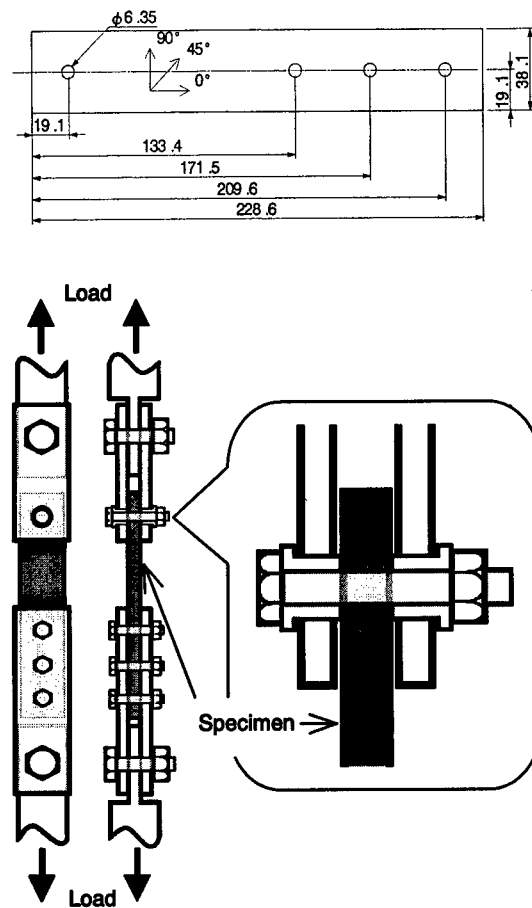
Specimen configuration and bolt-loading apparatus, dimensions in mm.
